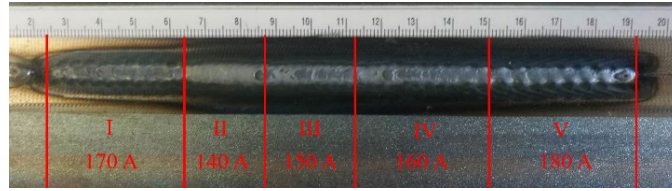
Welded Workpiece from Manual Welding.
